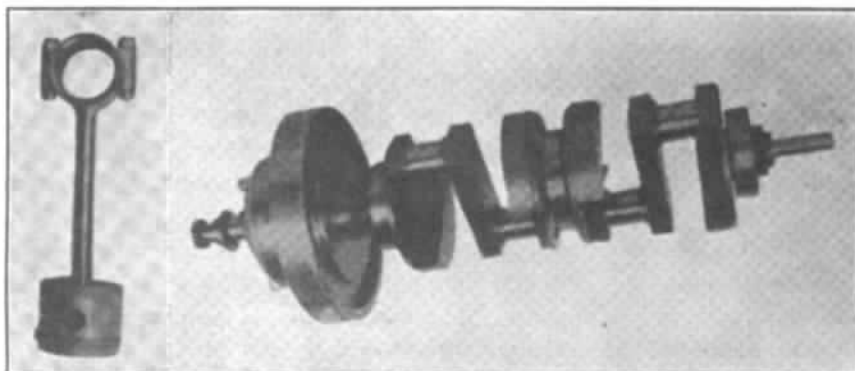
THE CONNECTING-ROD AND PISTON AT THE LEFT AND THE CRANKSHAFT, FLYWHEEL AND CLUTCH AT THE RIGHT
